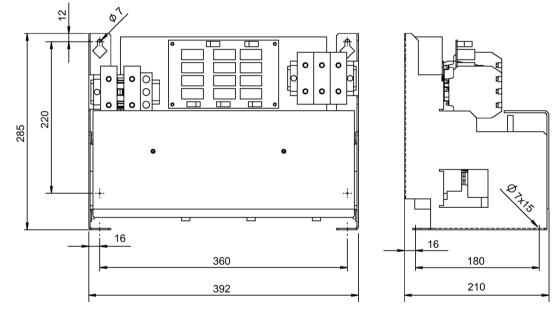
Dimension drawing of the voltage peak limiter, type 2
